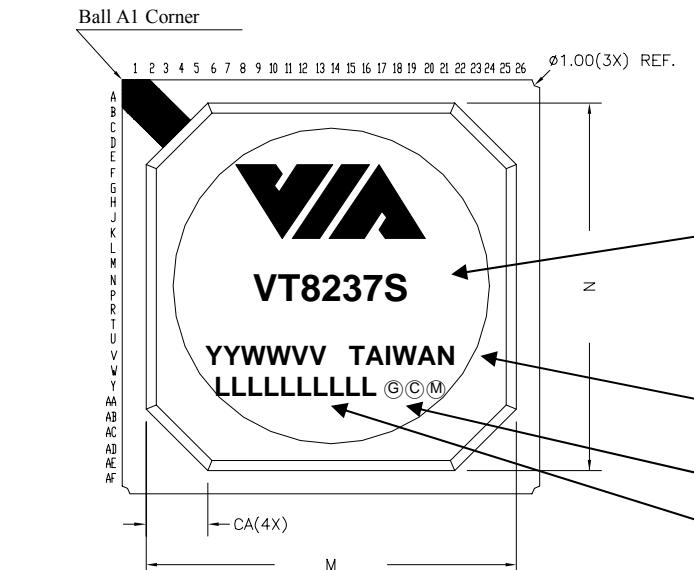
Mechanical Specifications – PBGA-542 Ball Grid Array Package
